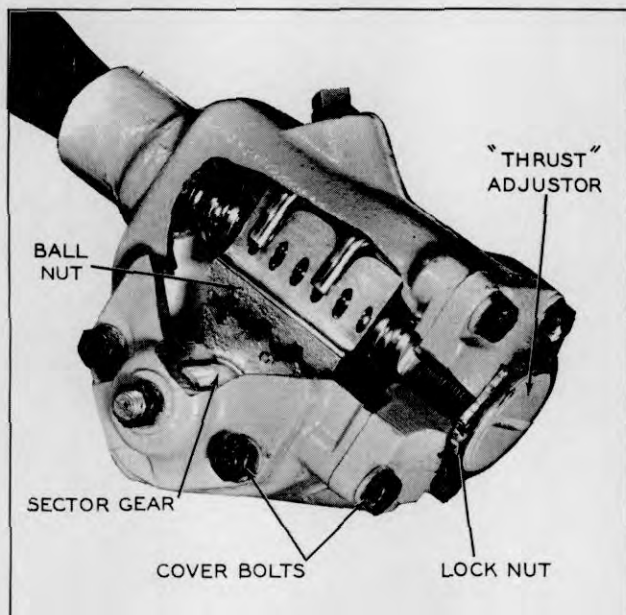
Steering Gear Thrust Adjustment (Worm Bearings)
